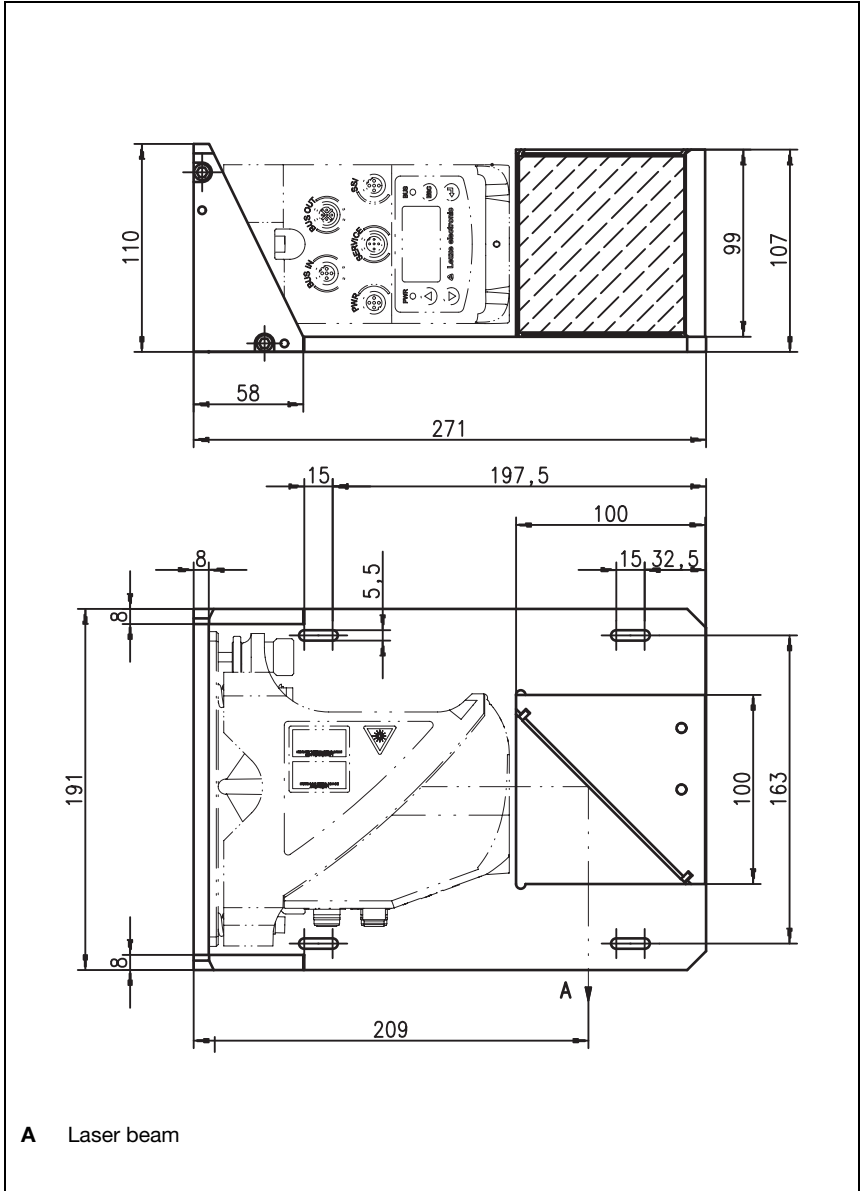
Dimensioned drawing of US AMS 01 deflector unit
